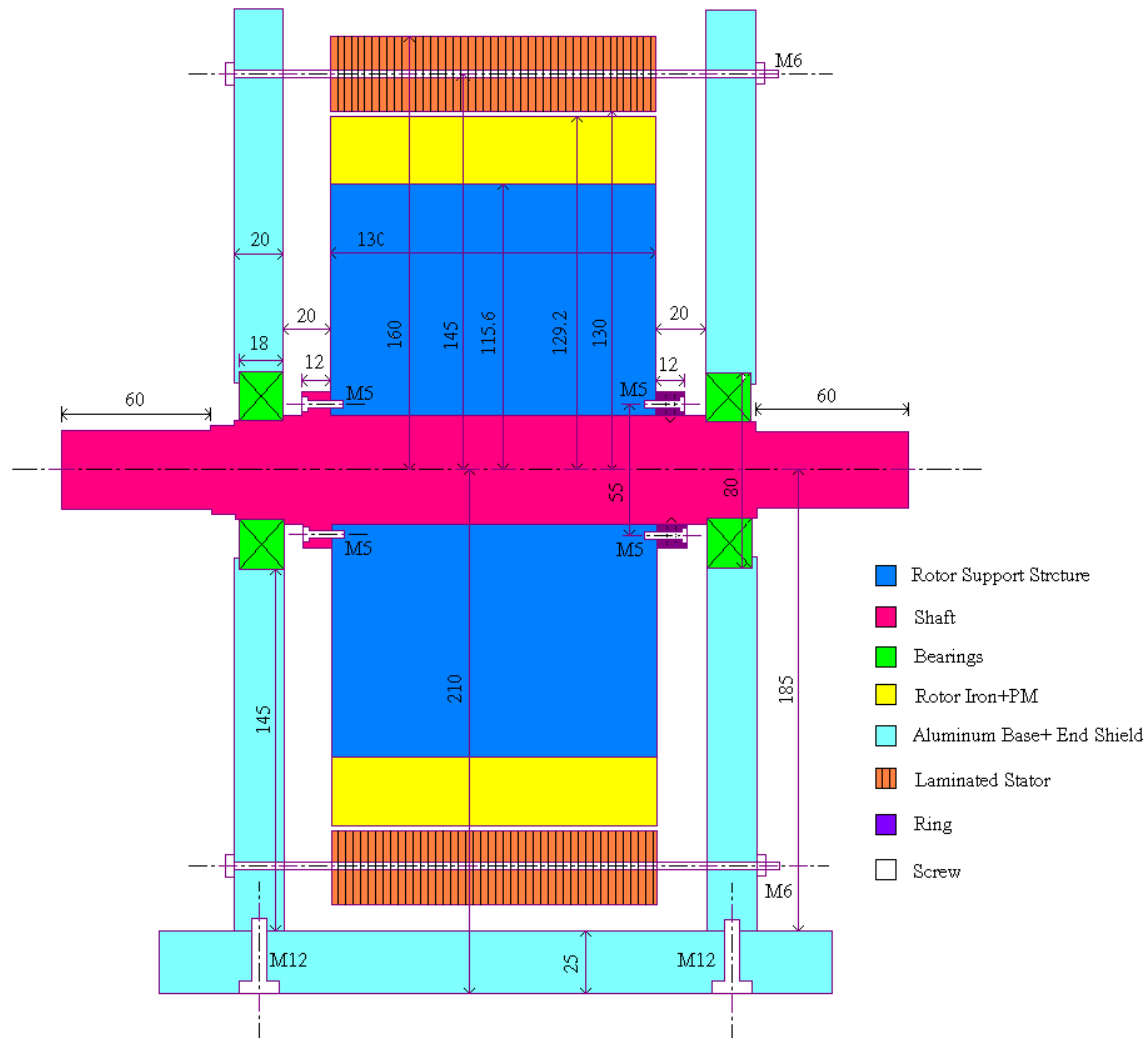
Longitudinal section of the prototype machine (windings are not shown)
